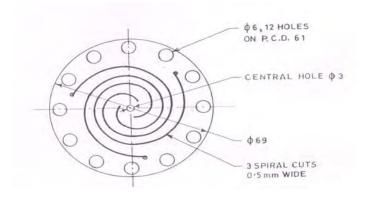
Typical Flexural Unit For Linear Compressor bearing
